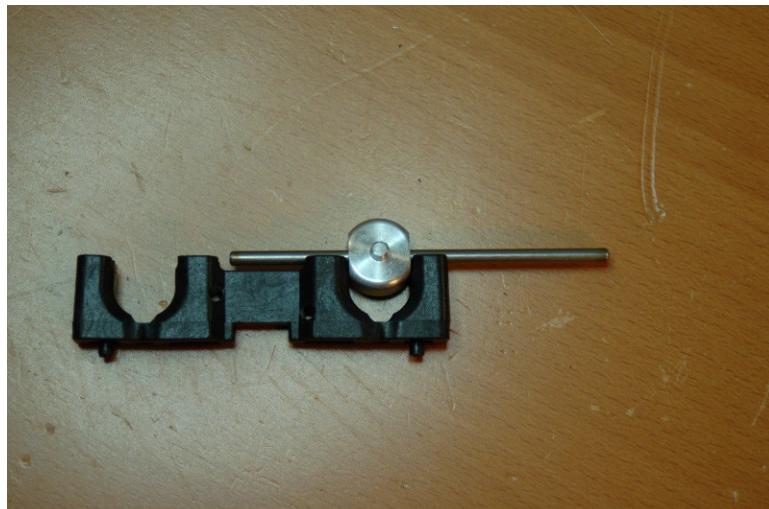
Test fitting a u-joint in the Carriage U-Joint mount.
